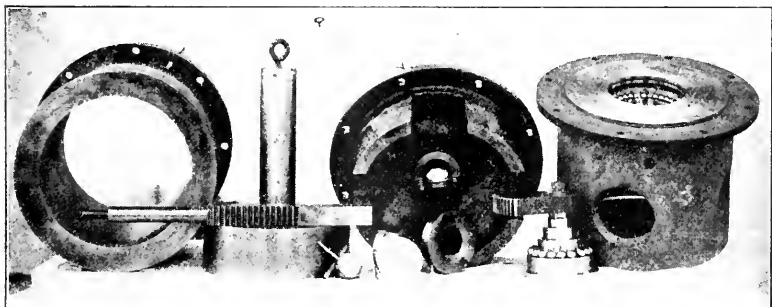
PARTS OF FIG. 2 BEFORE ASSEMBLY.
